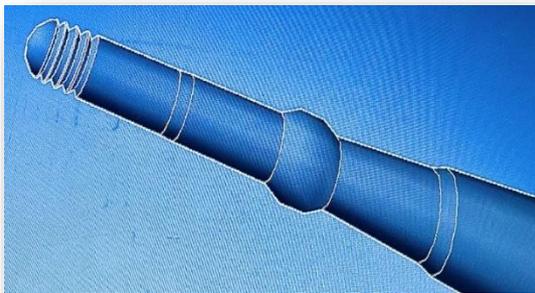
Detachable toothbrush handle assembly design –detailed view of external threads
